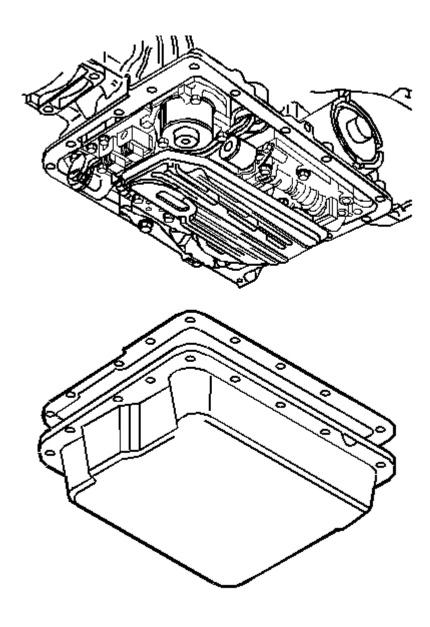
View Of Oil Pan & Gasket Courtesy of GENERAL MOTORS CORP.
